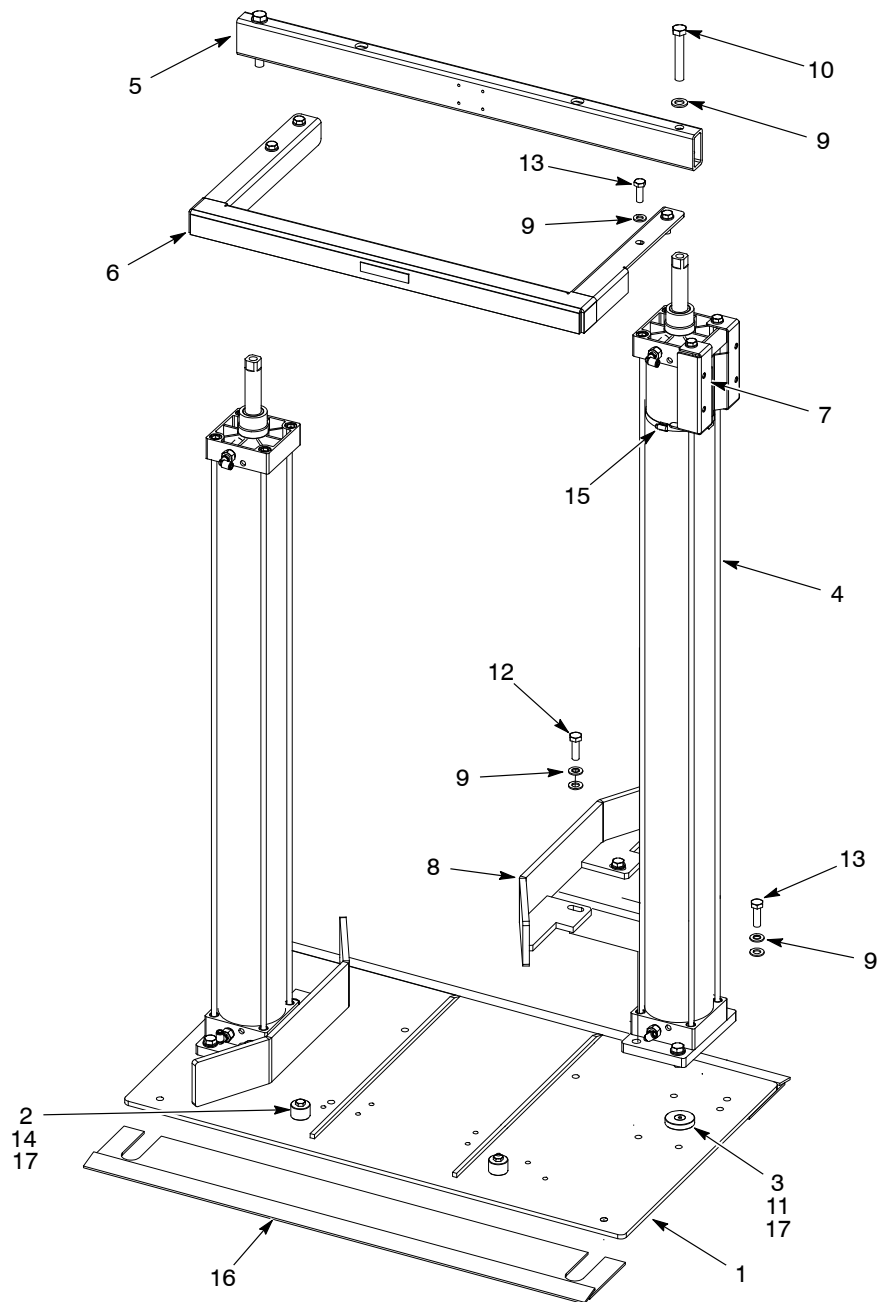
30- and 55-Gallon 160-mm Drum Cart Frame Parts
